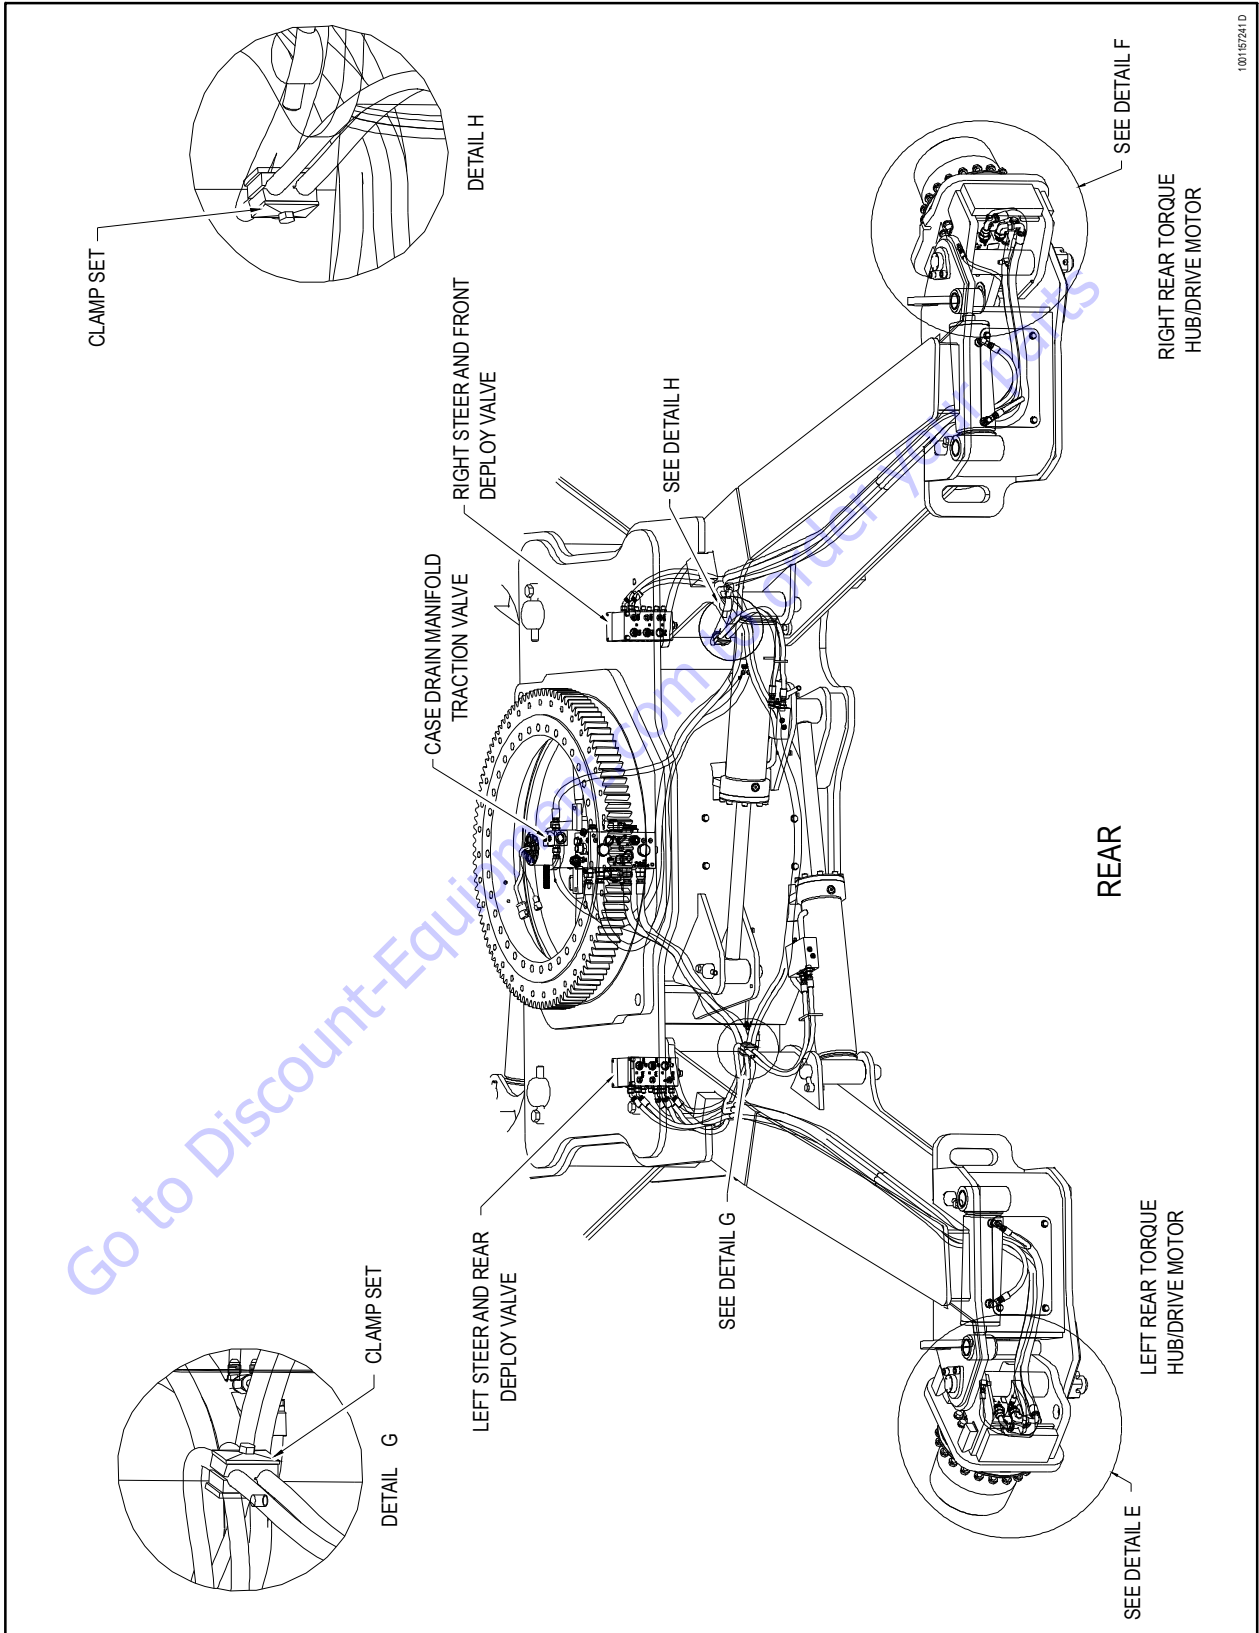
Chassis Hose Routing - Sheet 3 of 7
